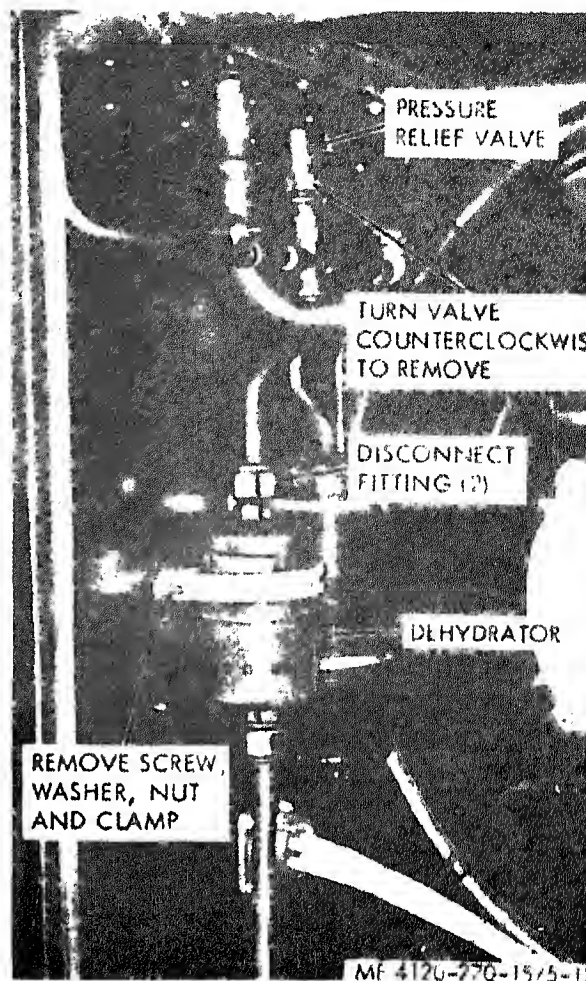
Pressure relief valve and dehydrator, removal and installation.
